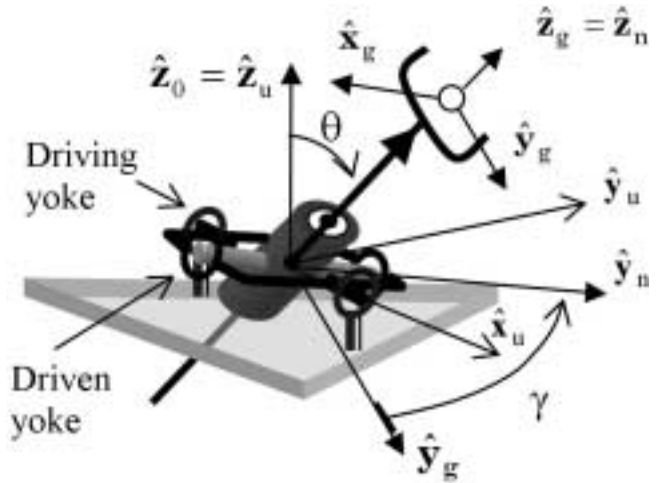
Upper moving platform, universal joint, screw body and gripper.
